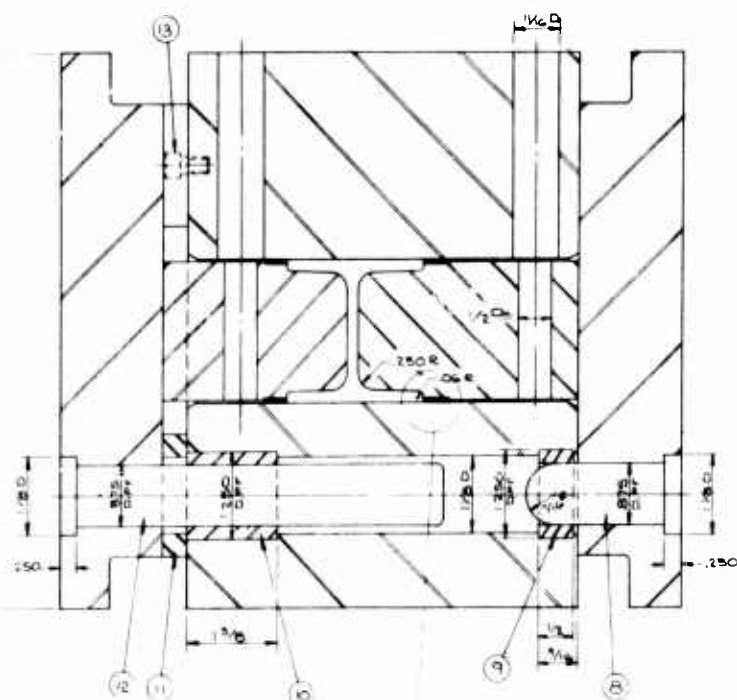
Design of Compression-Molding Tool for Idler Bell Crank.
